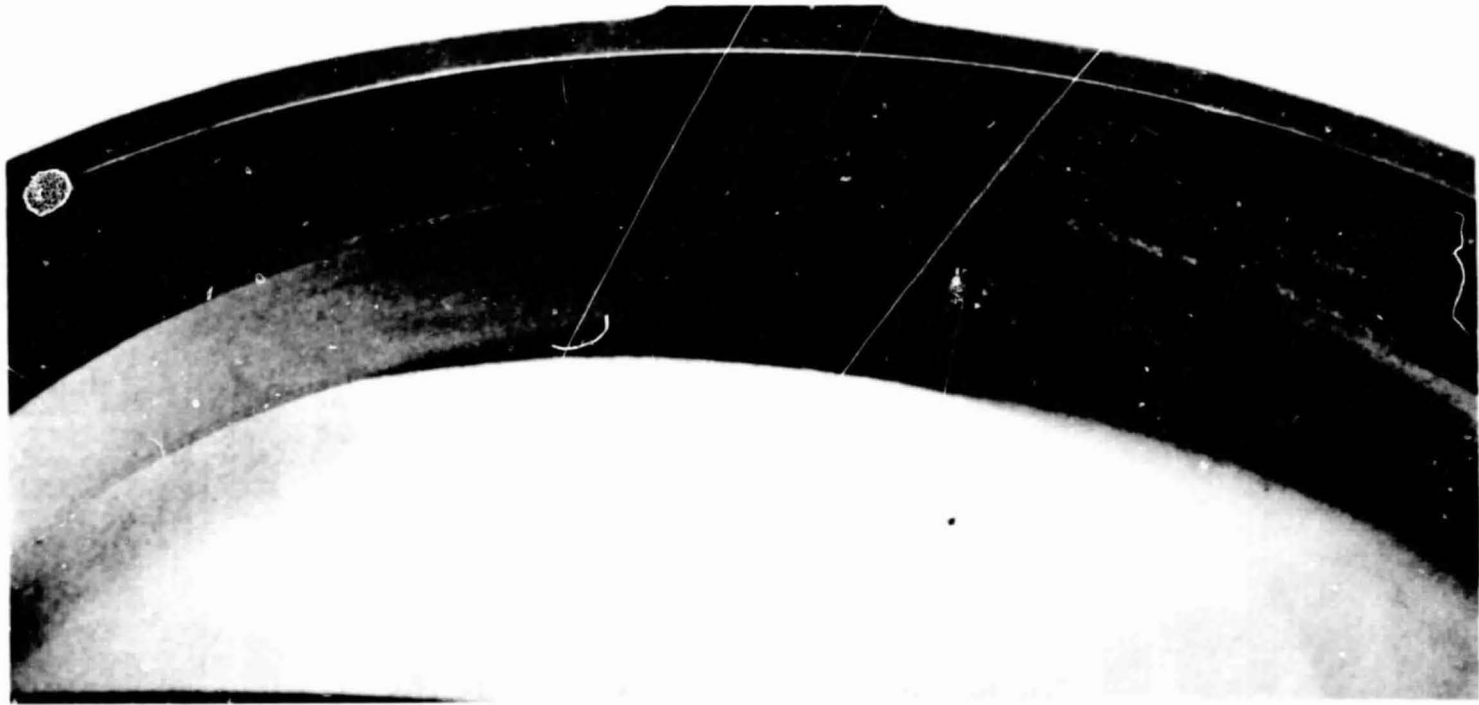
Pump End Secondary Seal Ring (Position 1), P/N 7R0011526,
